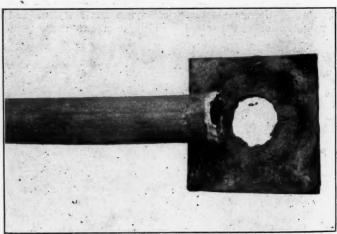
Welded Tube Pulled from Sheet.
